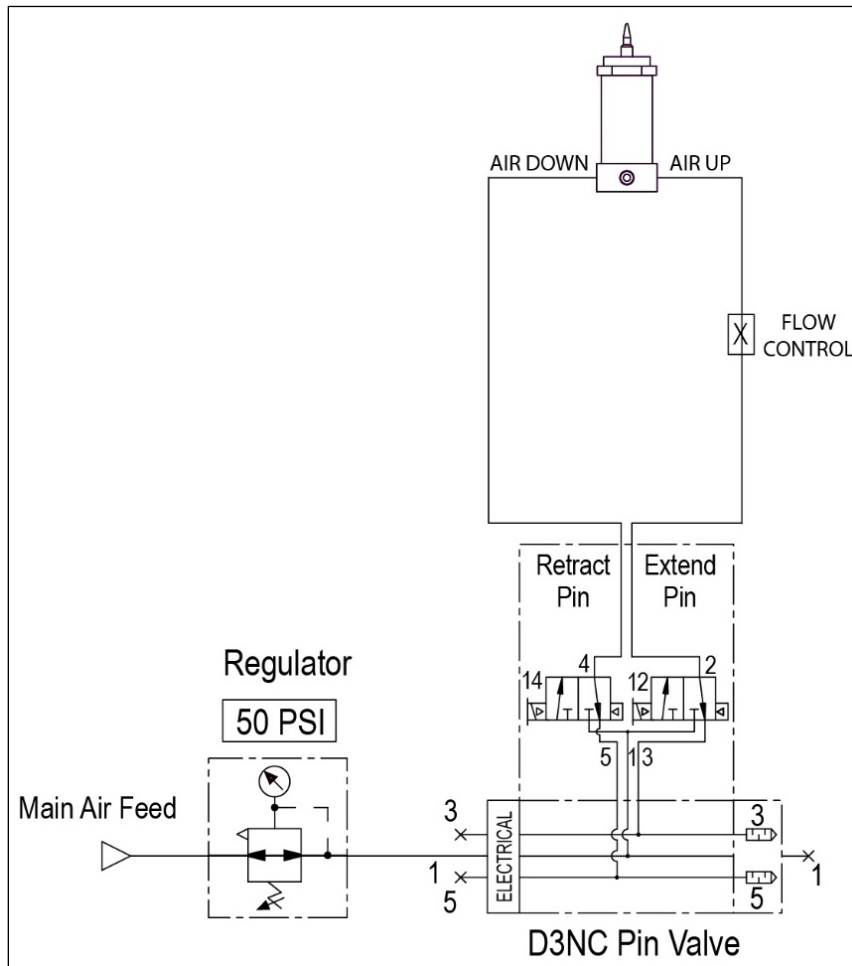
Pneumatic Connection Diagram for VeriFast™ IA Weld Body with Retractable Pin, using D3NC Valve (Not applicable to Clamp Mount Assembly)
